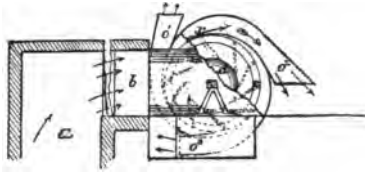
Bowlker and Watson's fan: elevation and part section.
